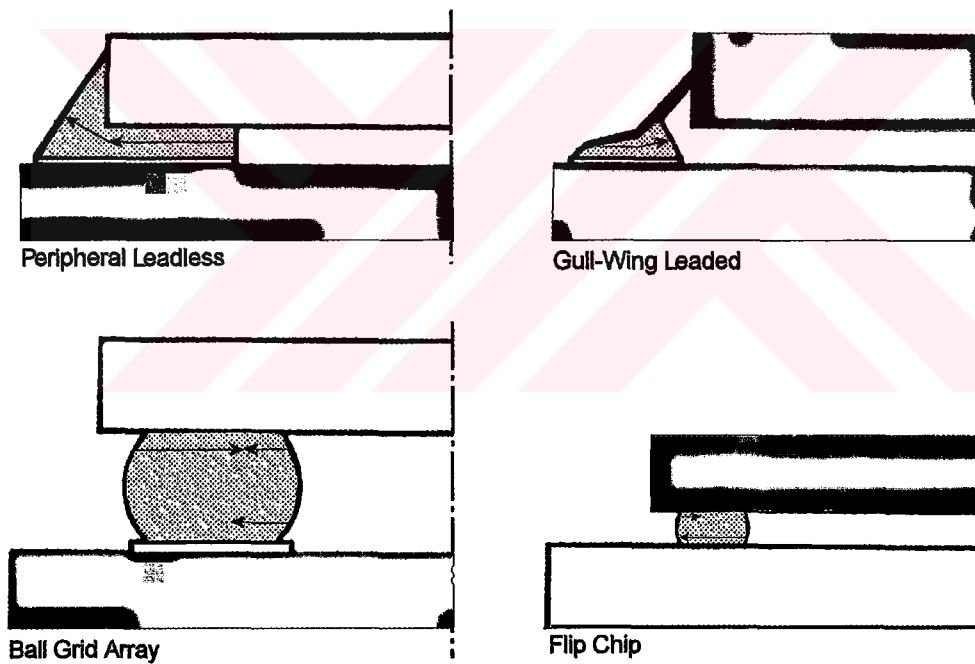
Crack initiation and growth in surface mount solder joints [5].
